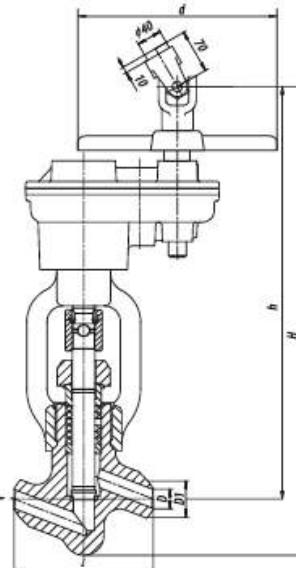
Stop valve DN32-65 with parallel-shaft reducer
